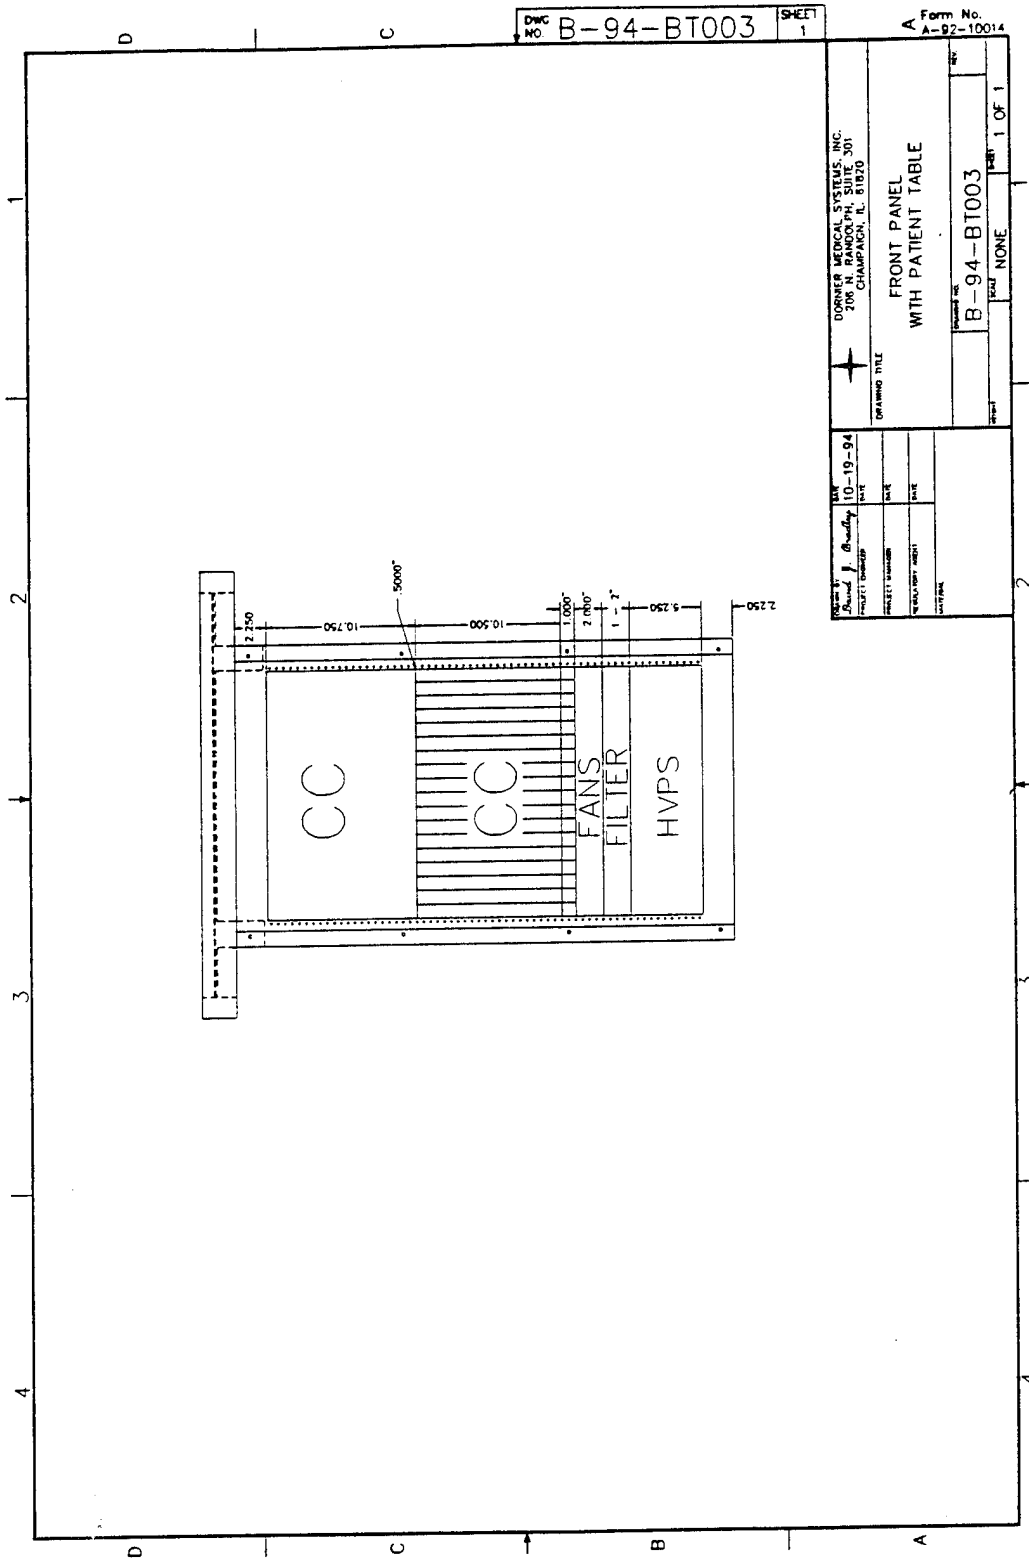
Drawing of internal layout of the key electronic system components inside the table central column
